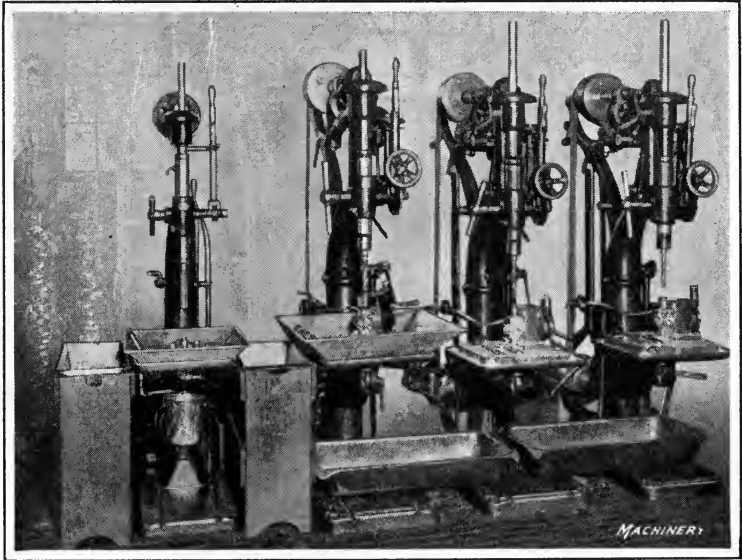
Vertical Drilling Machines equipped with Indexing Fixtures for Drilling Universal Joint Rings
